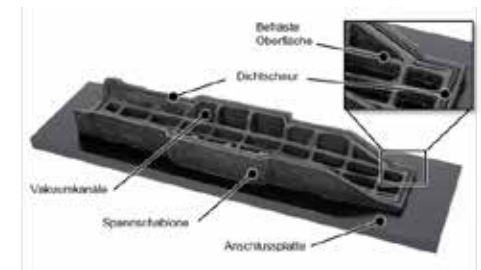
Vacuum clamping fixture of a B-pillar segment, manufactured by the SEAM process (©Fraunhofer IWU/IFA)
